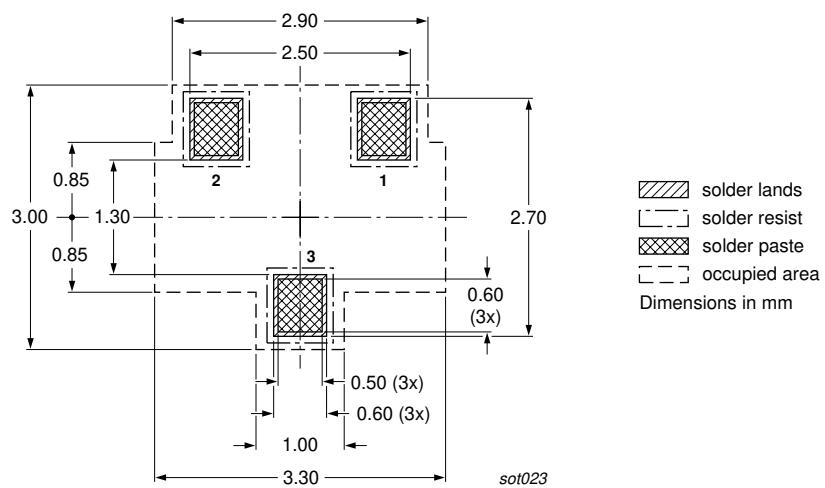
Reflow soldering footprint SOT23 (TO-236AB)
